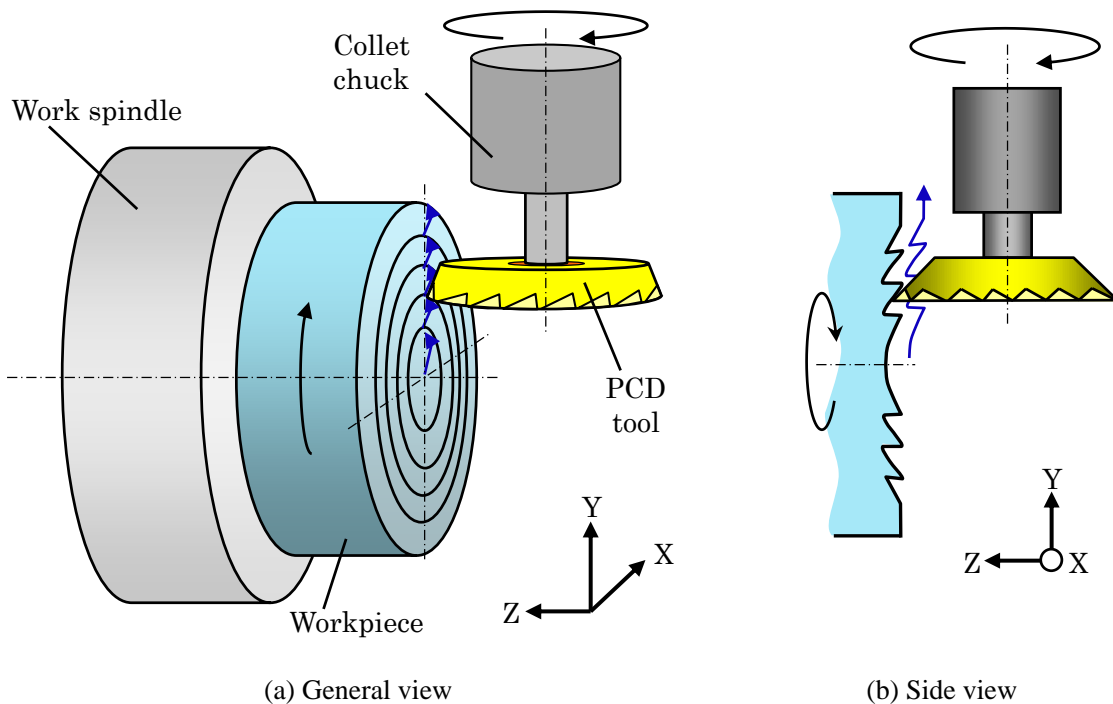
Improved Fresnel shape cutting of 2-axis control using the PCD milling tool.
